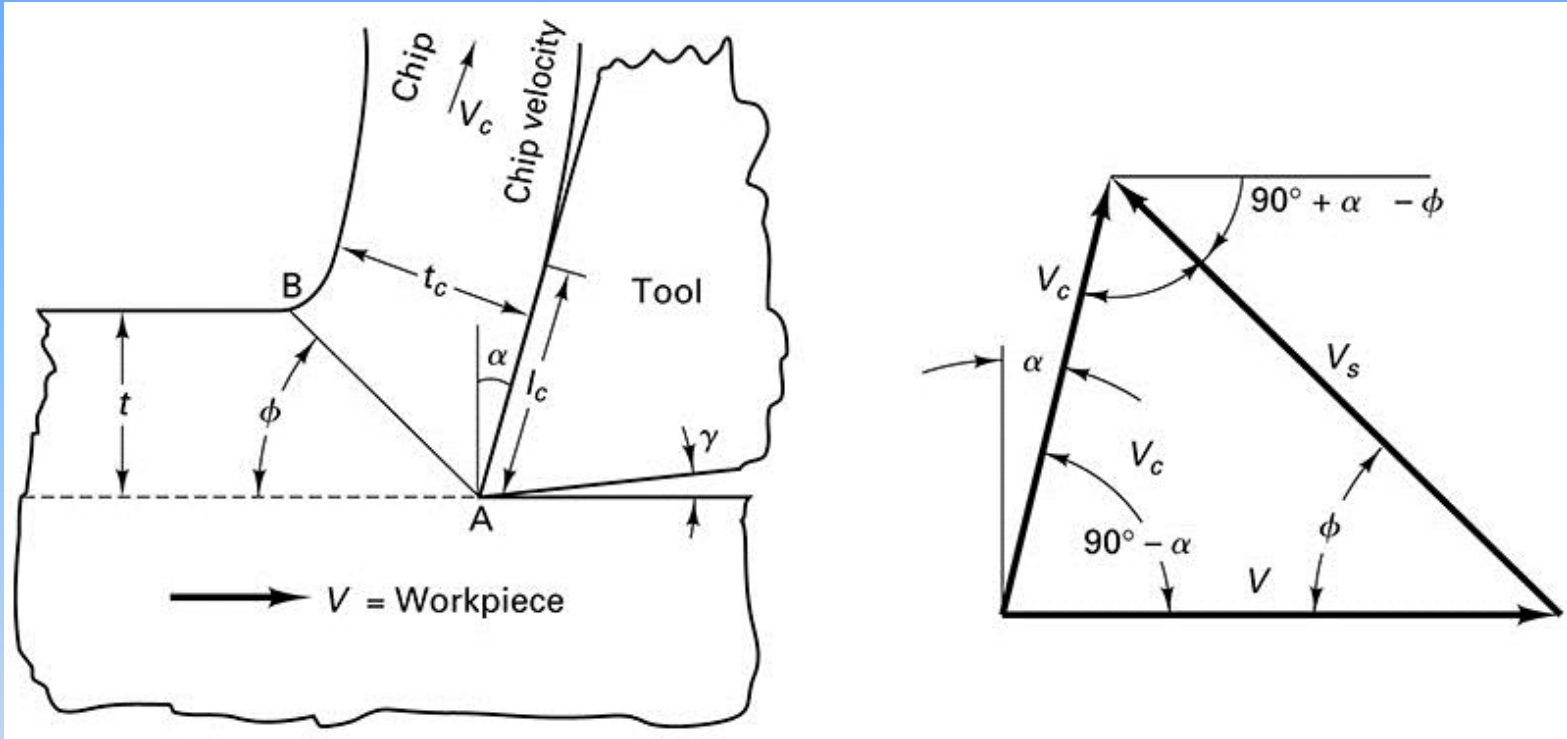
Schematic representation of the material flow, that is, the chip-forming shear process.  $f$  defines the onset of shear or lower boundary.  $c$  defines the direction of slip due to dislocation movement.
